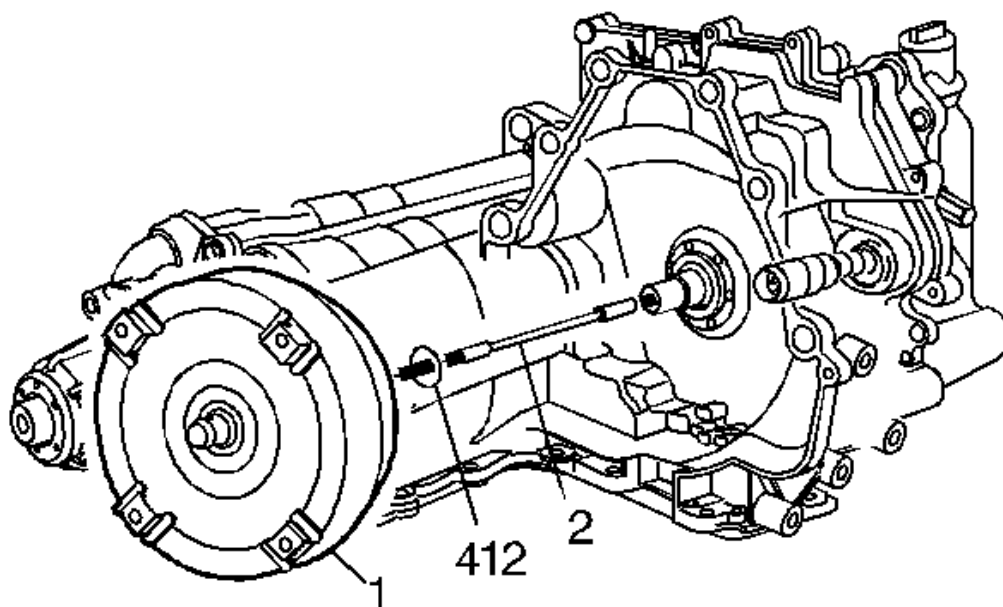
Oil Pump Driven Shaft & Torque Converter
